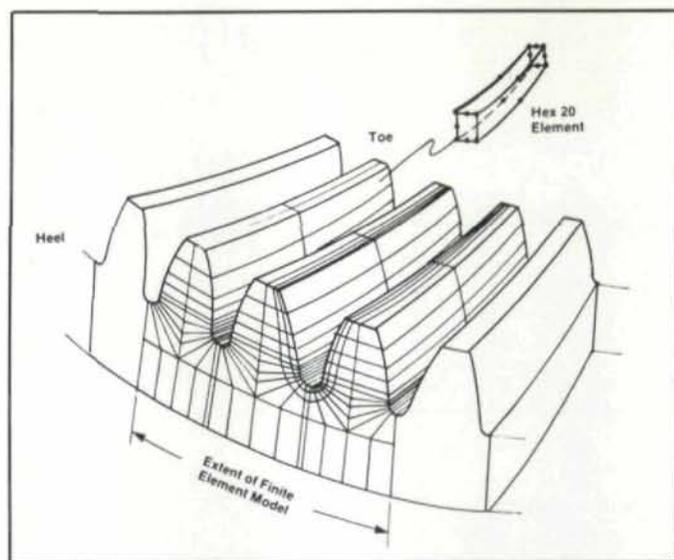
Five tooth segment of gear showing relative location of HEX 20 Finite Element Model
